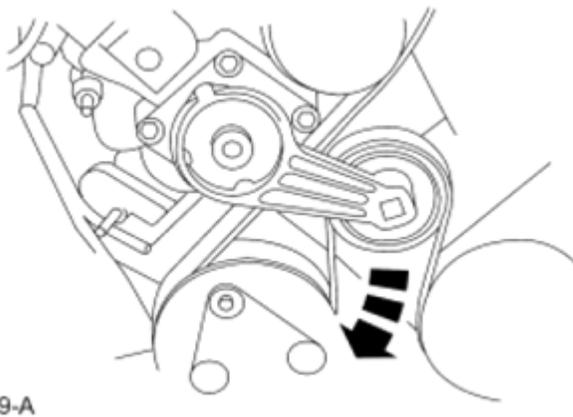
Rotating Tensioner Clockwise To Drive Belt
